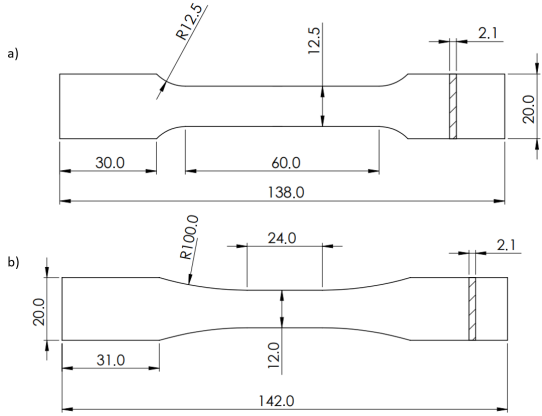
Specimen dimensions: a) tensile; b) fatigue.
